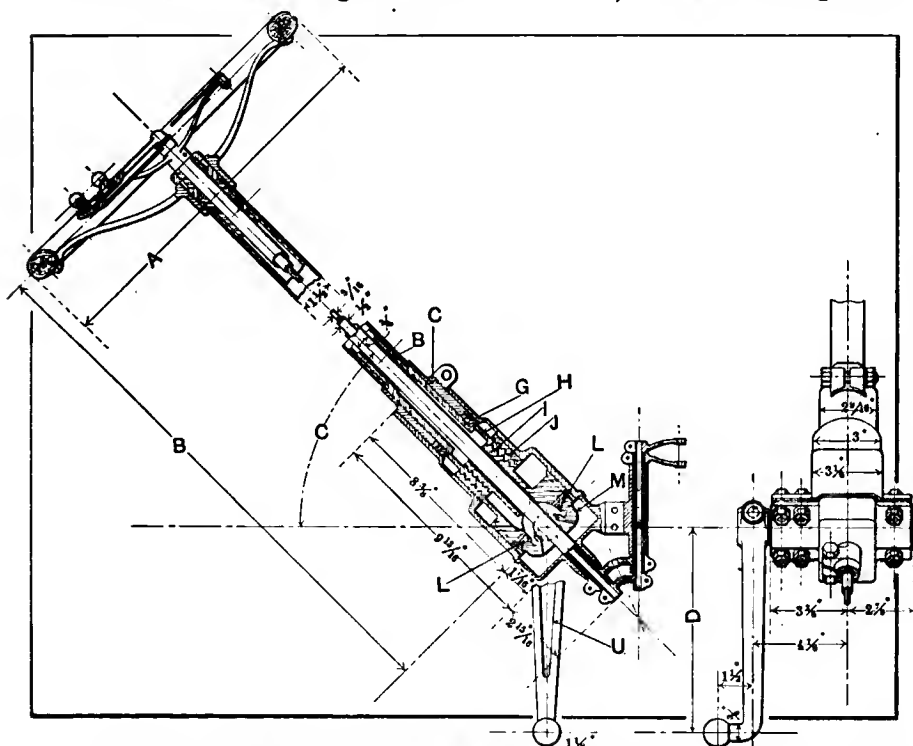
Model C regular Gemmer Gear, showing bevel type of spark and throttle connections, mode of control, and well-designed steering arm
